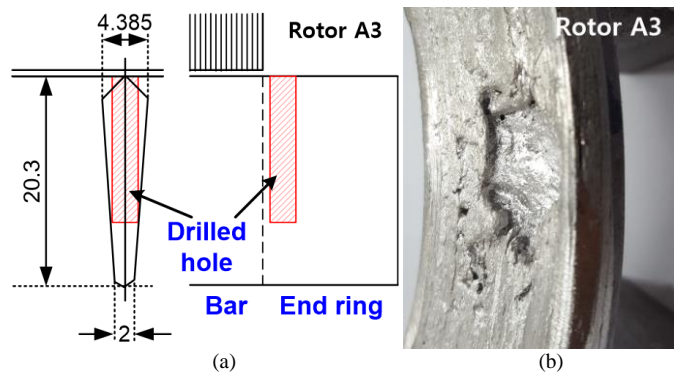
(a) Location of end ring holes for emulating uniformly distributed porosity (rotor A3), and (b) end ring porosity due to manufacturing defect observed for rotor A3
